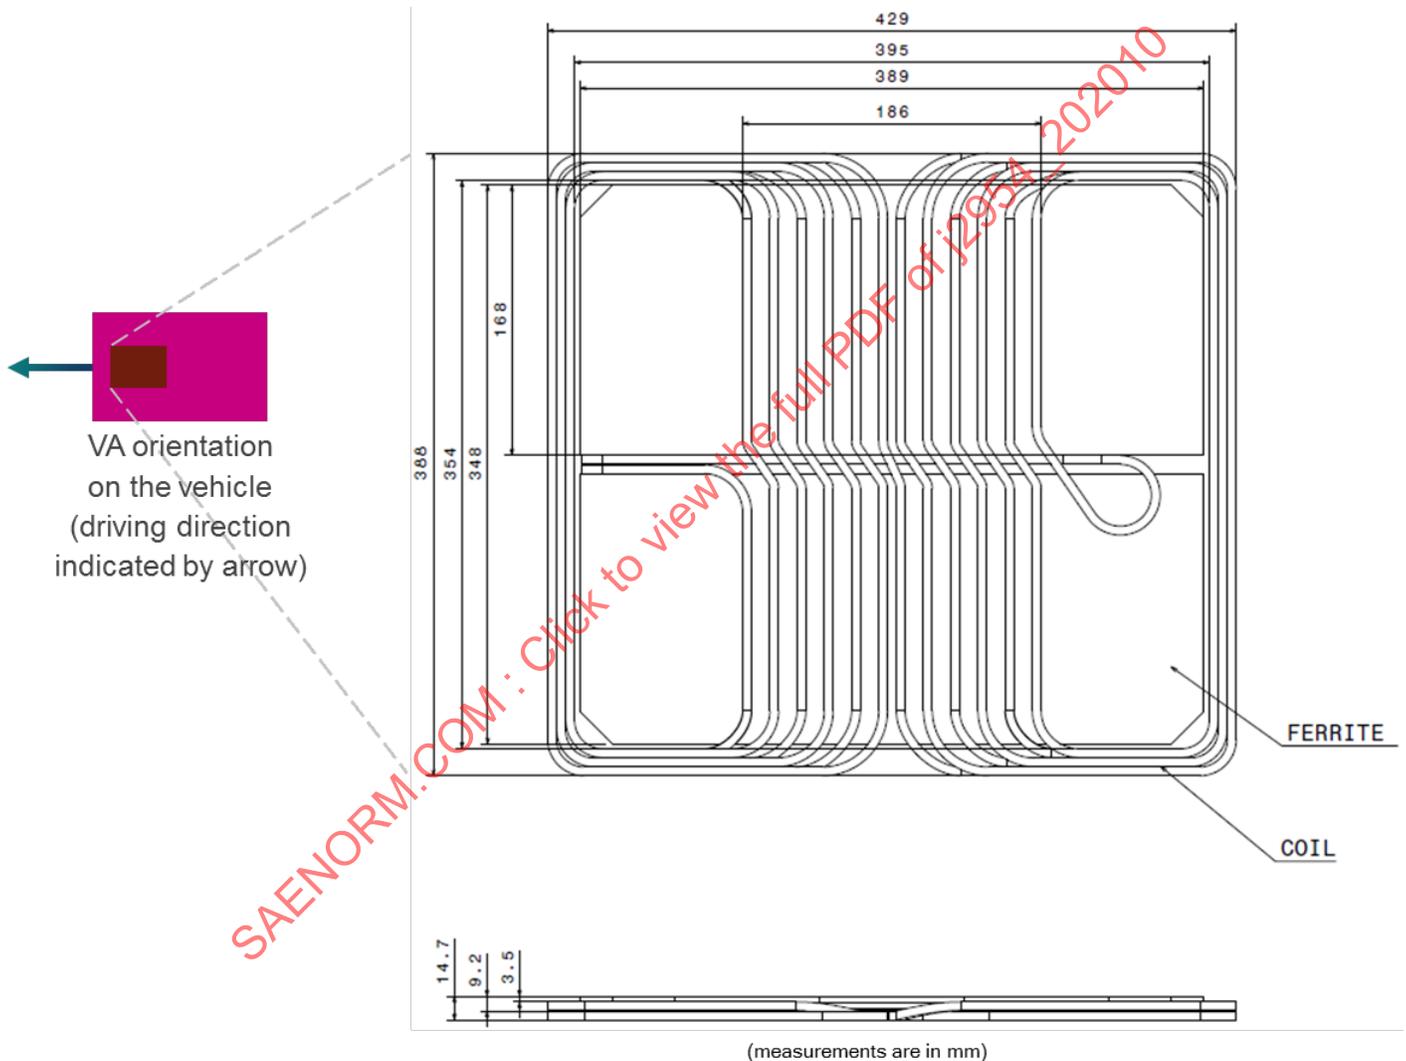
Mechanical dimensions of the Product VA WPT3/Z3
